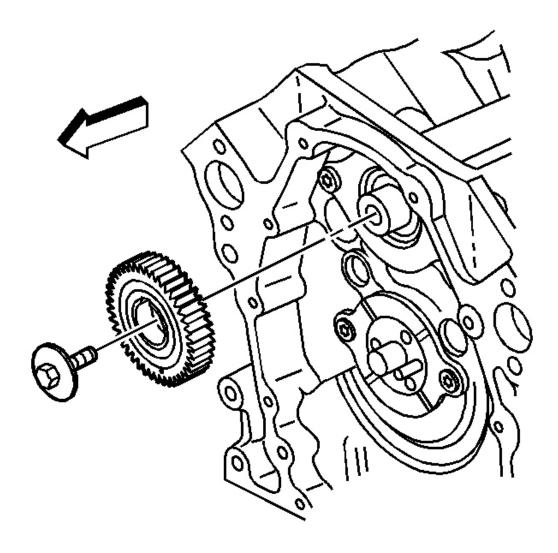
Locating Balance Shaft Driven Gear Courtesy of GENERAL MOTORS CORP.
